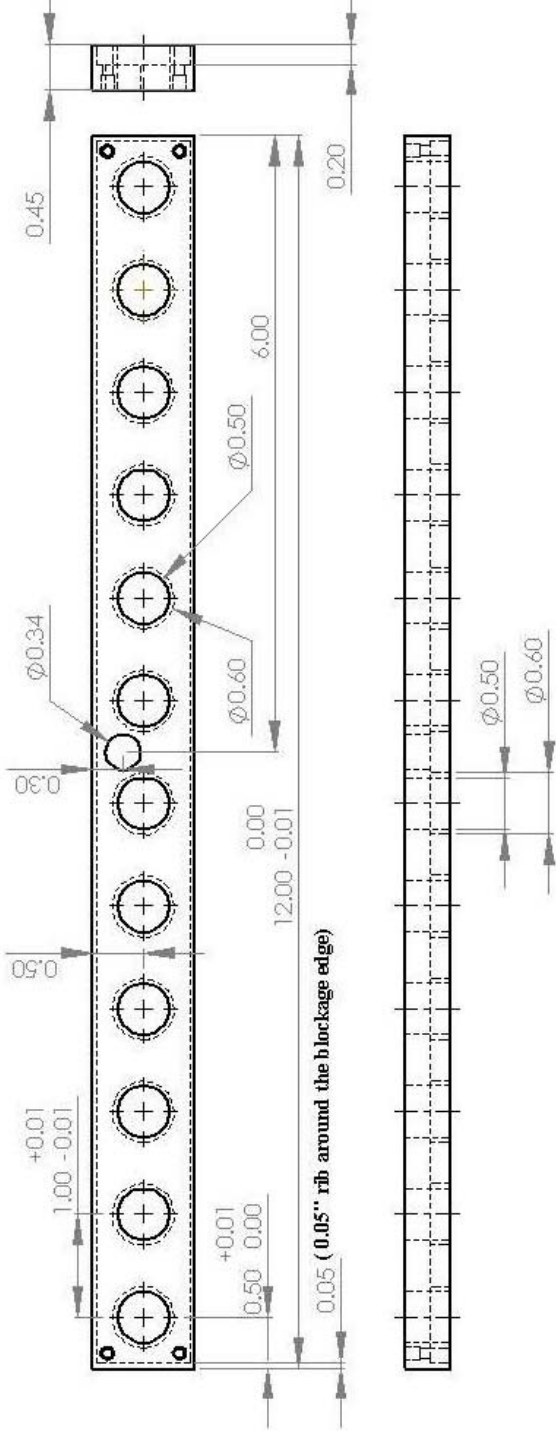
Engineering drawing for blockage configuration 1 (Third angle projection)
